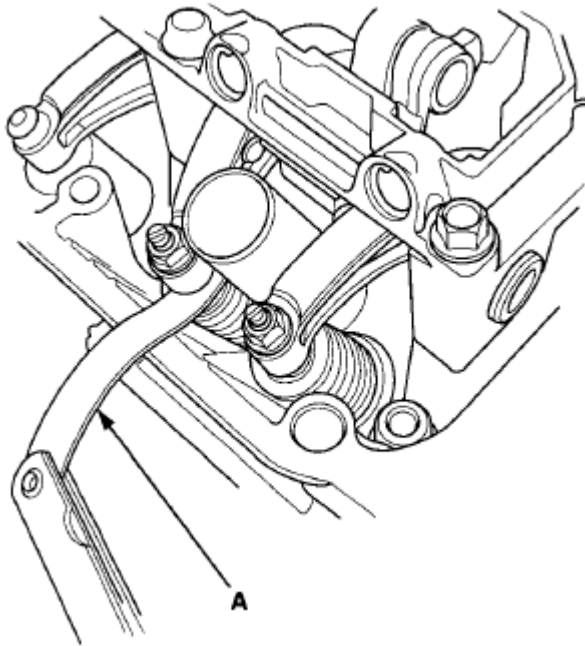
Inserting Feeler Gauge In Exhaust Valve
